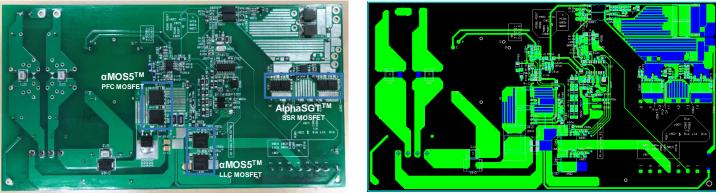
Evaluation Board Bottom View and Bottom Layer View
